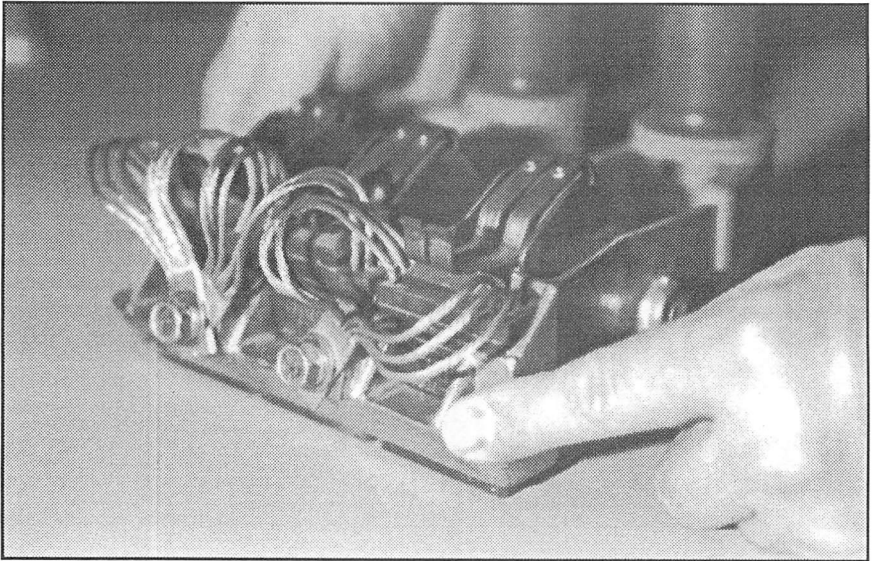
EMD brush holder showing proper placement of spring fingers and shunt wires
